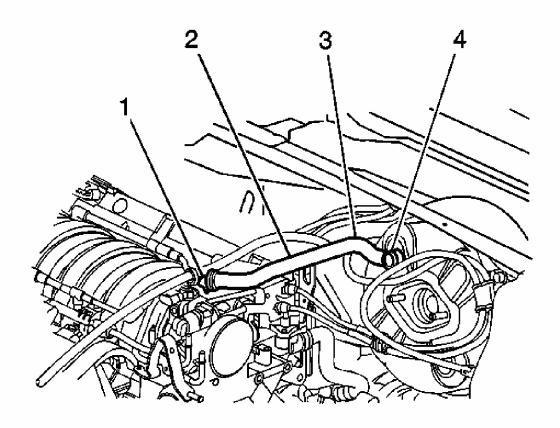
Removing/Installing Vacuum Hose & Brake Booster Vacuum Check Valve
